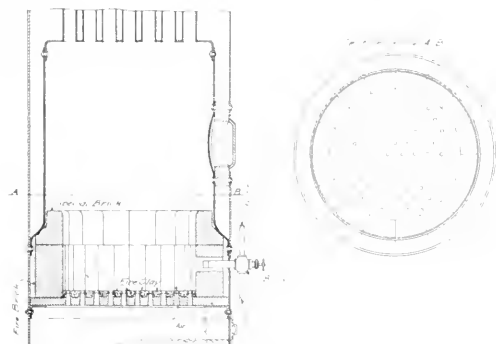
Arrangement of Donkey Boiler for Oil Burning.
